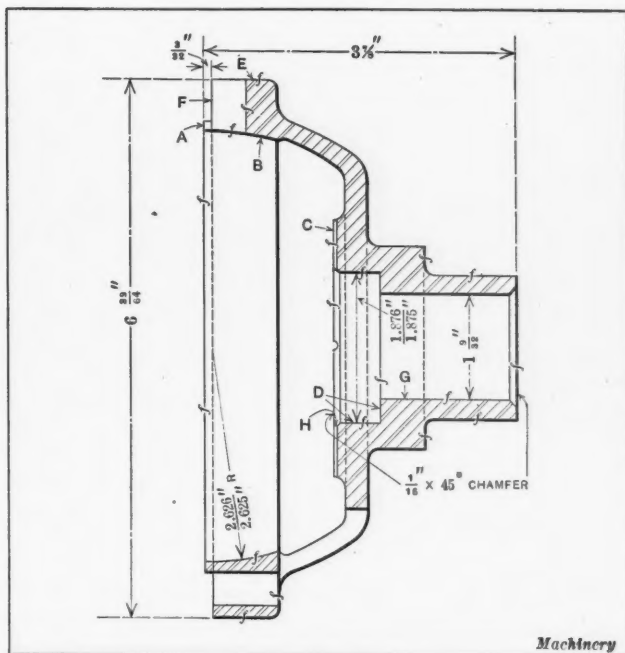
Cross-sectional View of Male Half of Differential Gear Case, showing Surfaces that are machined on Flat Turret Lathe
